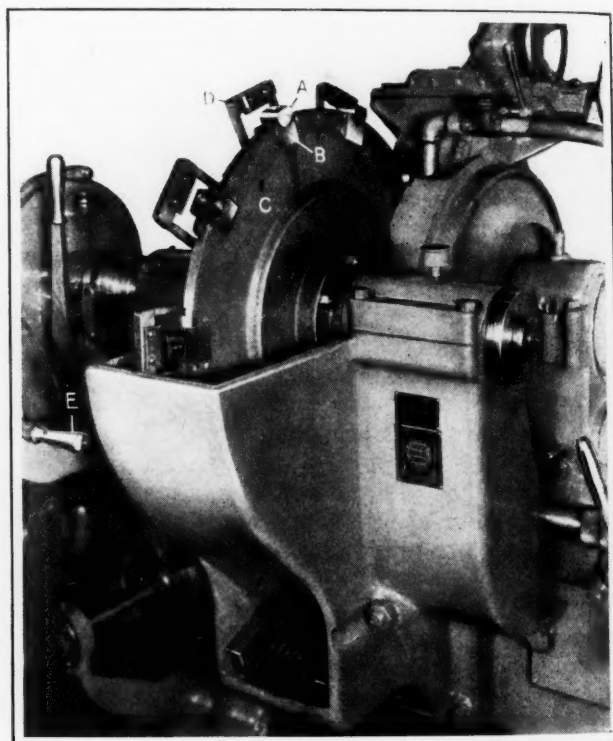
Carrier Unit which Conveys the Universal Joint Blocks between the Grinding Ring Wheels
